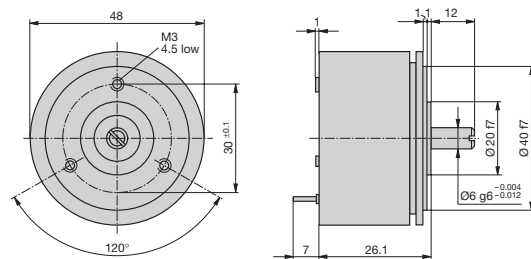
KINAX 3W2 with special drive shaft at front only,
